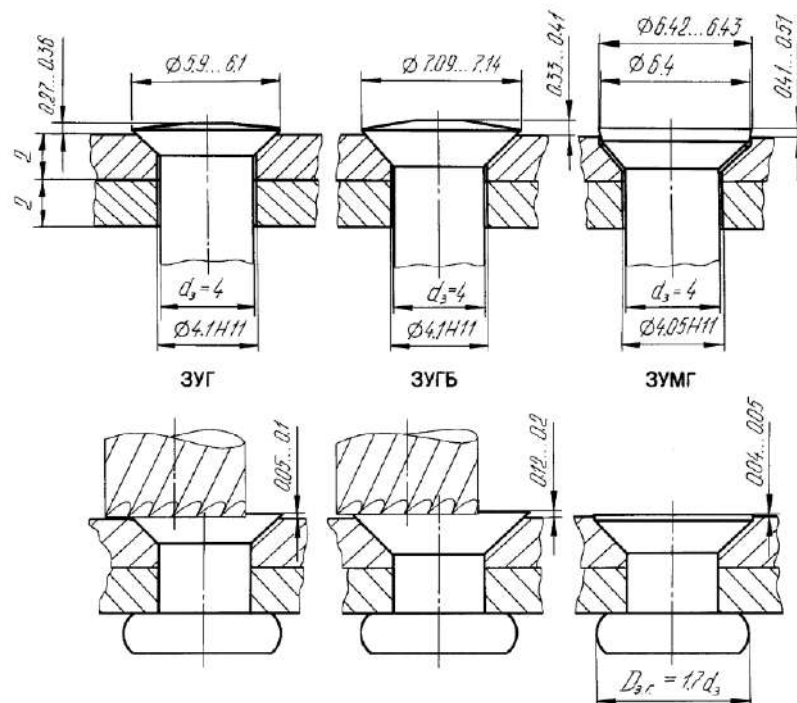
Parameters of riveted joints with rivets conforming to Branch Standard OCT 1 34117-91 (3YГ(ZUG)), 3YГБ (ZUGB) and 3YМГ (ZUMG) having standard diameter of 4 mm
